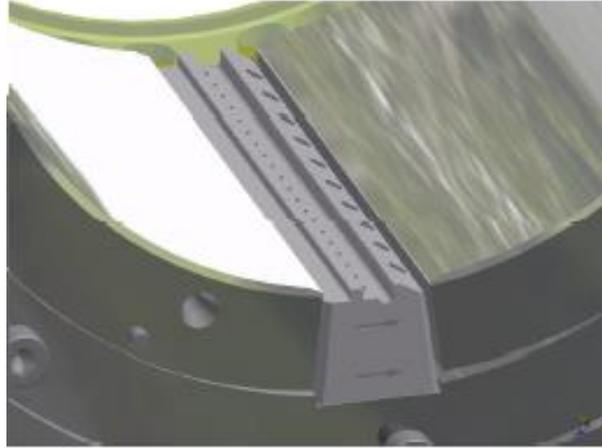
Three-dimensional presentation of a tilting-pad bearing; space between pads filled by means of oil drainage, dams and oil injection unit according to design E2.
